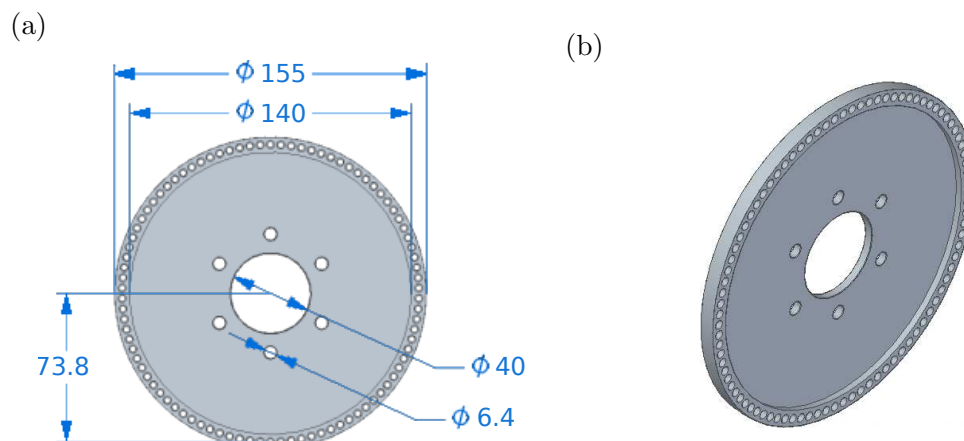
The CAD drawing of the magnet holders, both (a) with and (b) without the dimensions marked. The dimensions are in mm.
